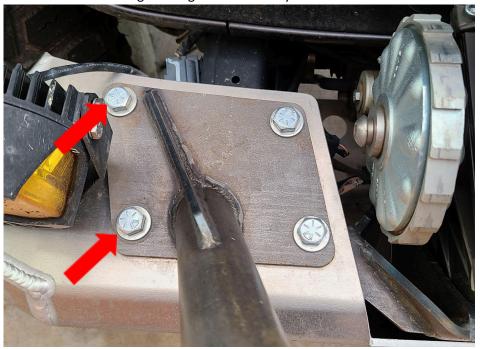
Stinger mounting bolts. Note that the bolts called out with red arrows will also go through the winch tray.
